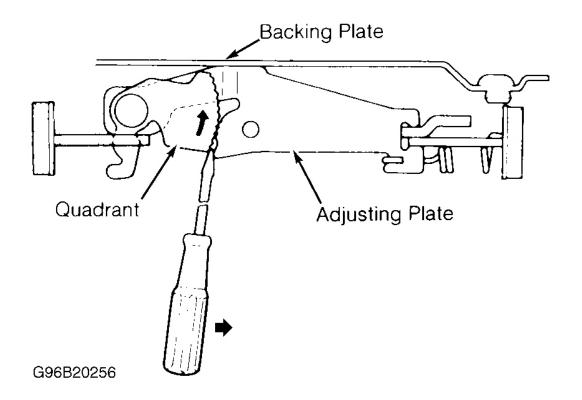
Moving Quadrant On Rear Drum Brake Adjuster (MX-6 & 626 Shown; MX-3 & Protege Are <u>Similar</u>) Courtesy of MAZDA MOTORS CORP.
